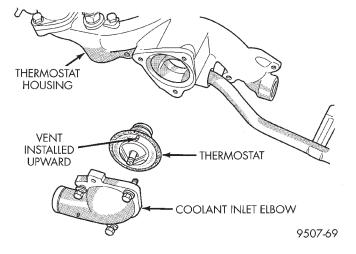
Thermostat, Housing and Inlet Elbow—2.5L Engine
